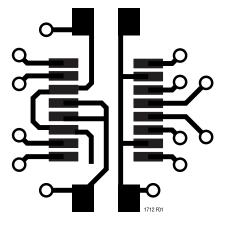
Typical Topside Metal for Multilayer PCB Layout
